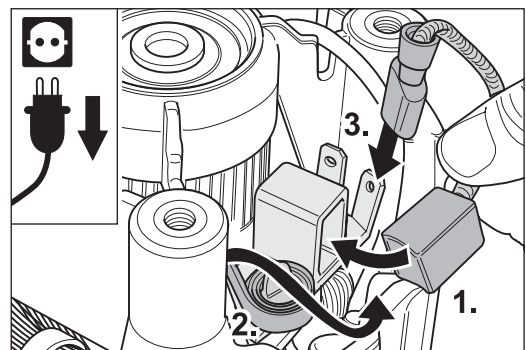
Insert the new carbon brush (1.), turn the brass pressure clamp back (2.) and attach the connector (3.).
